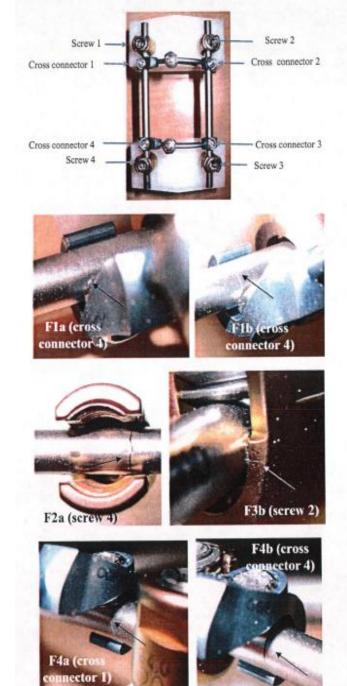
Failure Modes Identified Under Fatigue Compression Test on XIA 3 Constructs Assembled with Radius Rod
